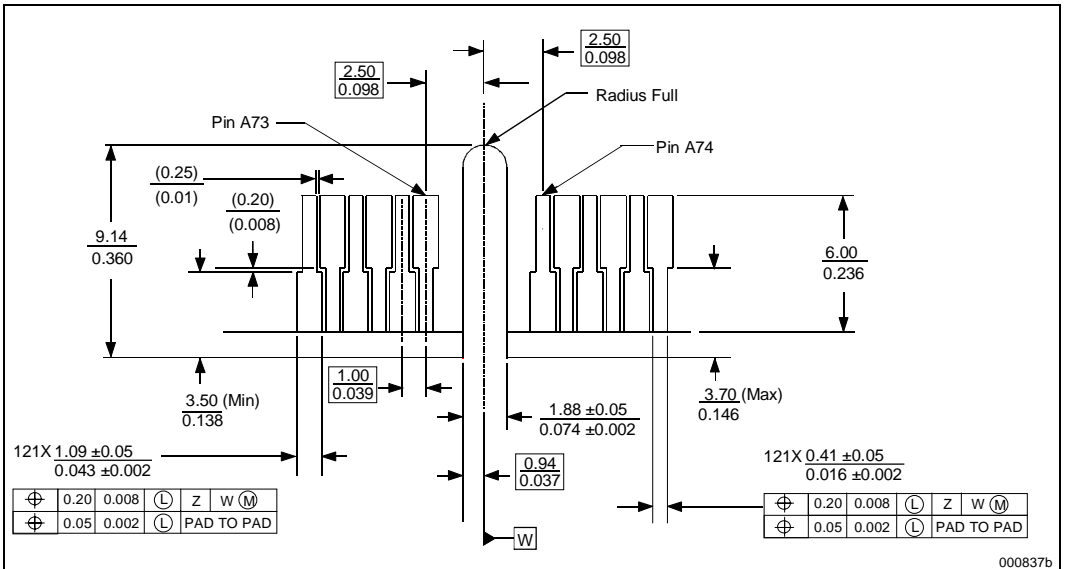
Substrate – Edge Finger Contact Dimensions, Thermal Plate Side View (Detail)
